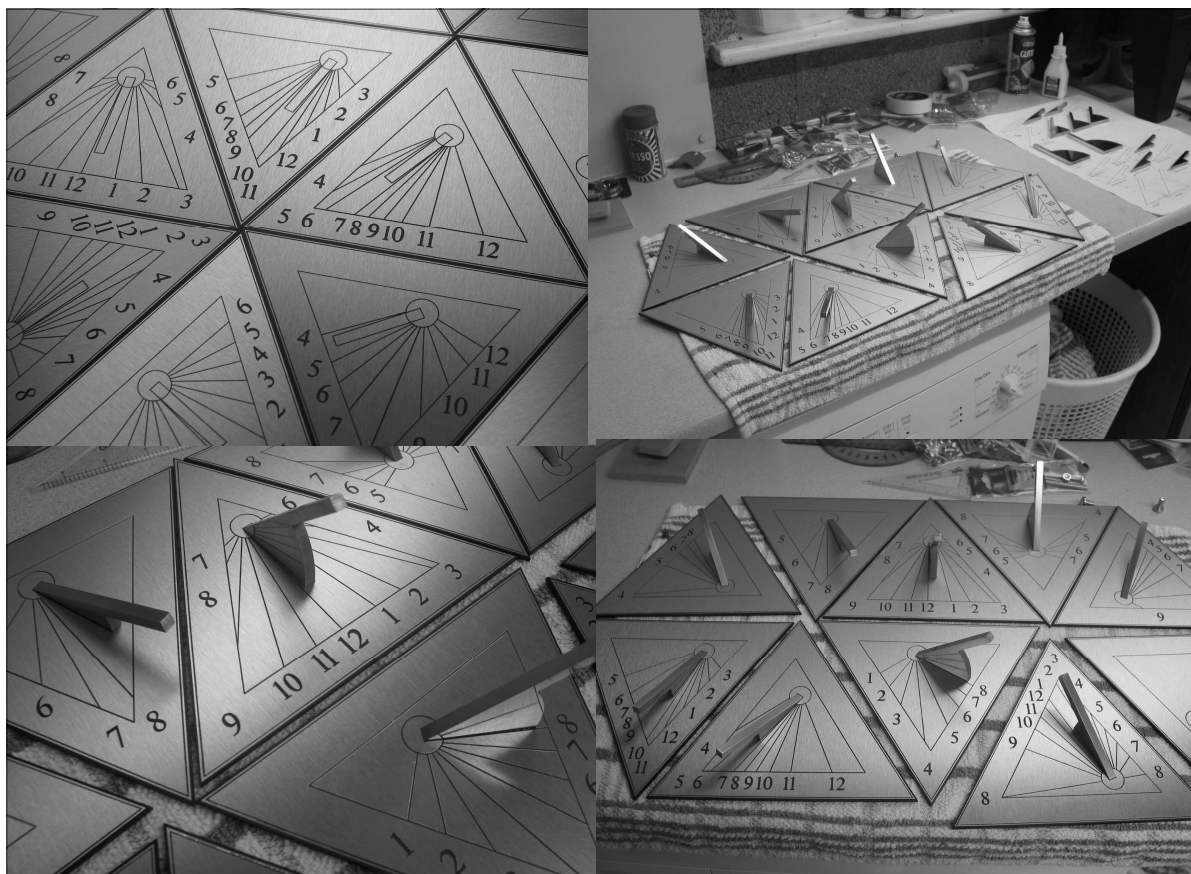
Four views of some of the dial plates being assembled before fitting to the icosahedron.
